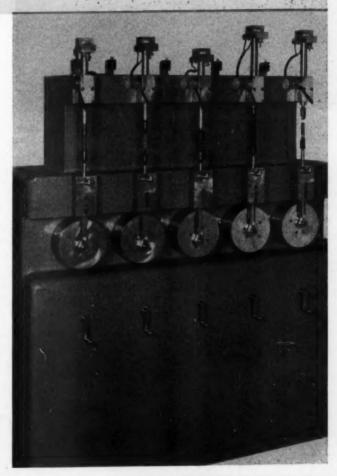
Krouse spring fatigue-testing machine. Tension and compression springs are tested to failure under simulated service conditions
